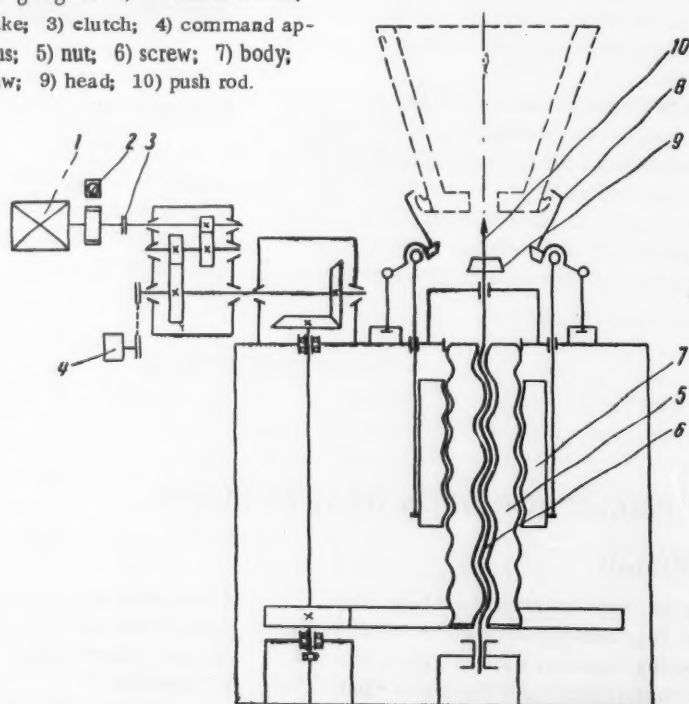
Arrangement of machine for stripping ingots: 1) electrical motor; 2) brake; 3) clutch; 4) command apparatus; 5) nut; 6) screw; 7) body; 8) claw; 9) head; 10) push rod.
